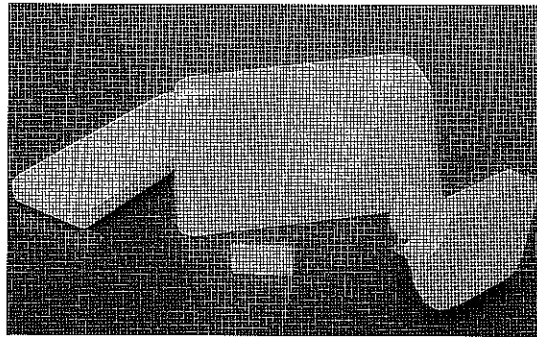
Prototype parts left to right: base, body, blade, and tape roll support
